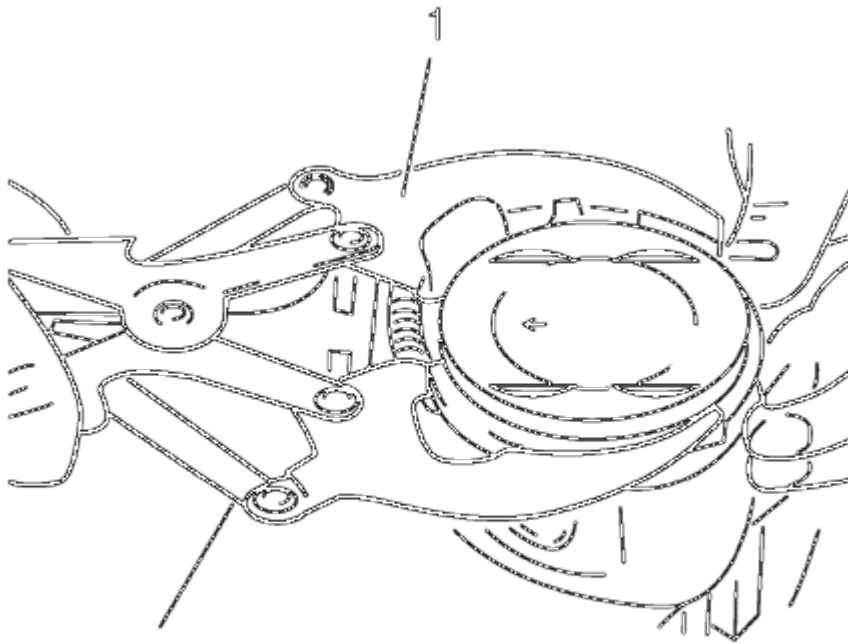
Removing Piston Rings Using Piston Ring Pliers
